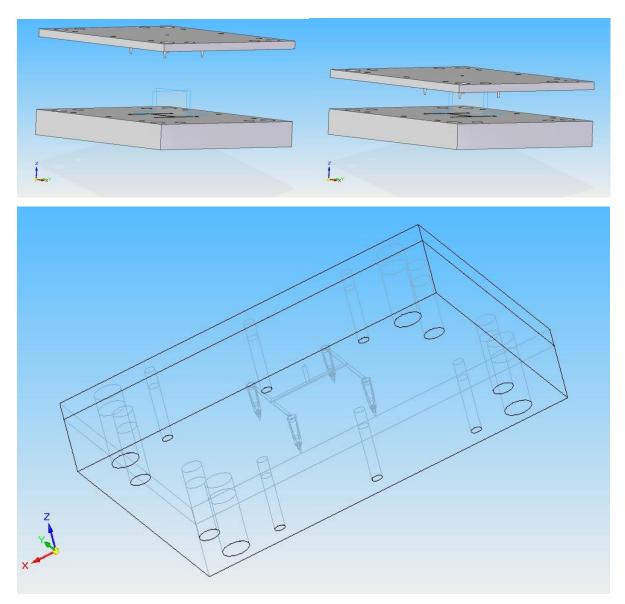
The assembly regarding the sample B, core plate and cavity plate
